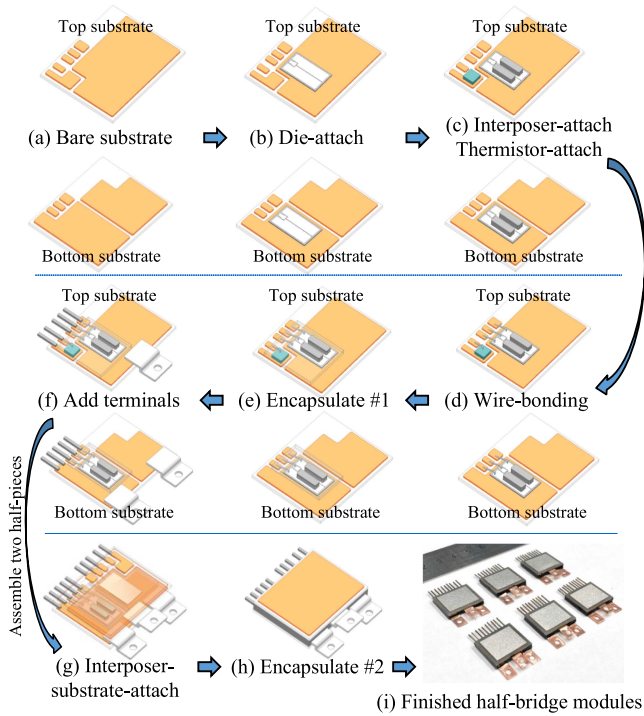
Fabrication steps of the double-side cooled half-bridge modules in Layout #2.
